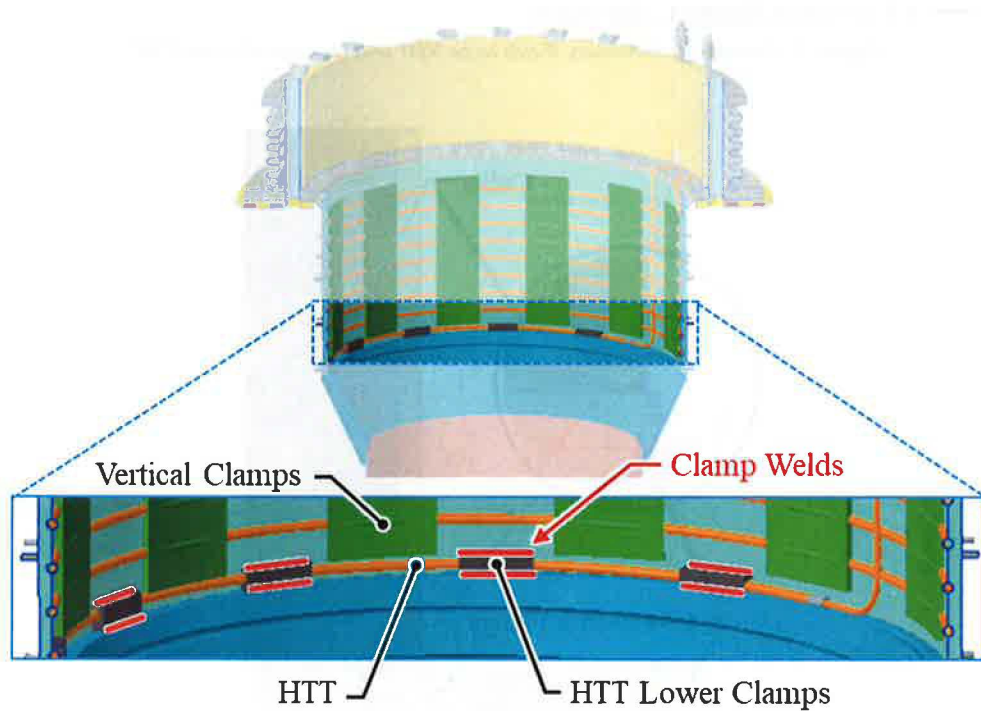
HTT Lower Clamp Welds to be subjected to NDT
